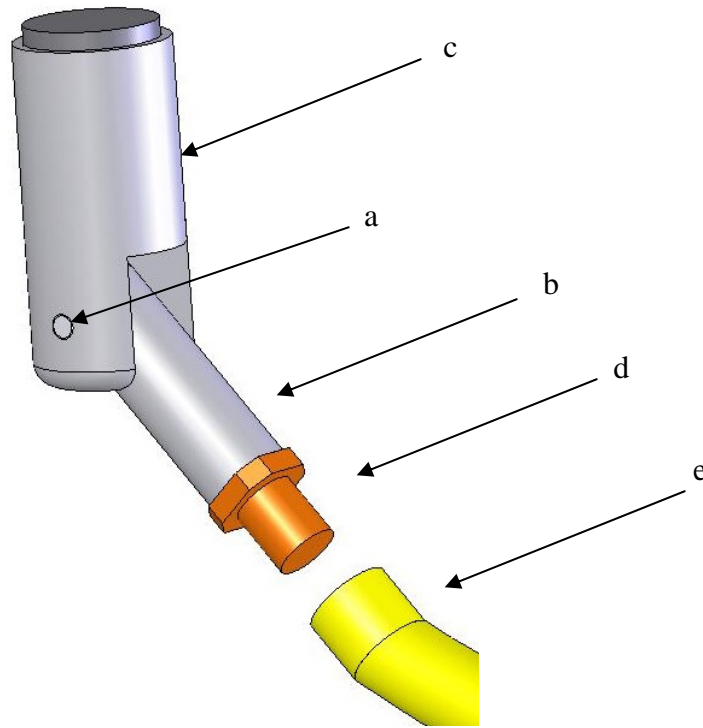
Assembly of sling retractor revision b. The dowel pin (a) is installed to secure the pivot (b) to the magnet mount (c). The barb fitting (d) is installed in the pivot and the tubing (e) is installed onto the barb fitting.
